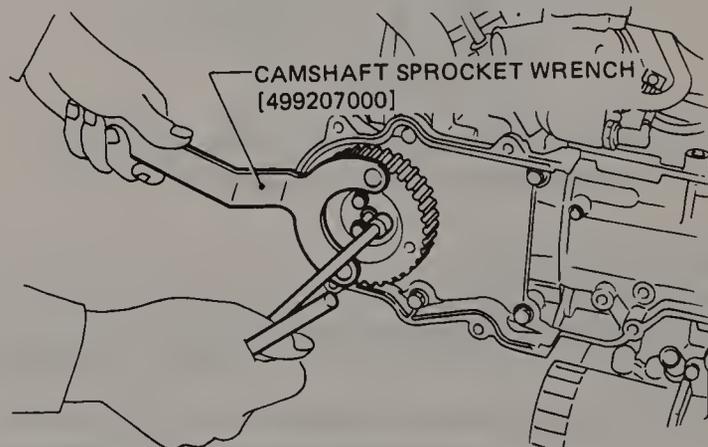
Use a camshaft sprocket wrench to hold the sprocket while removing the bolts (Sec 5)
